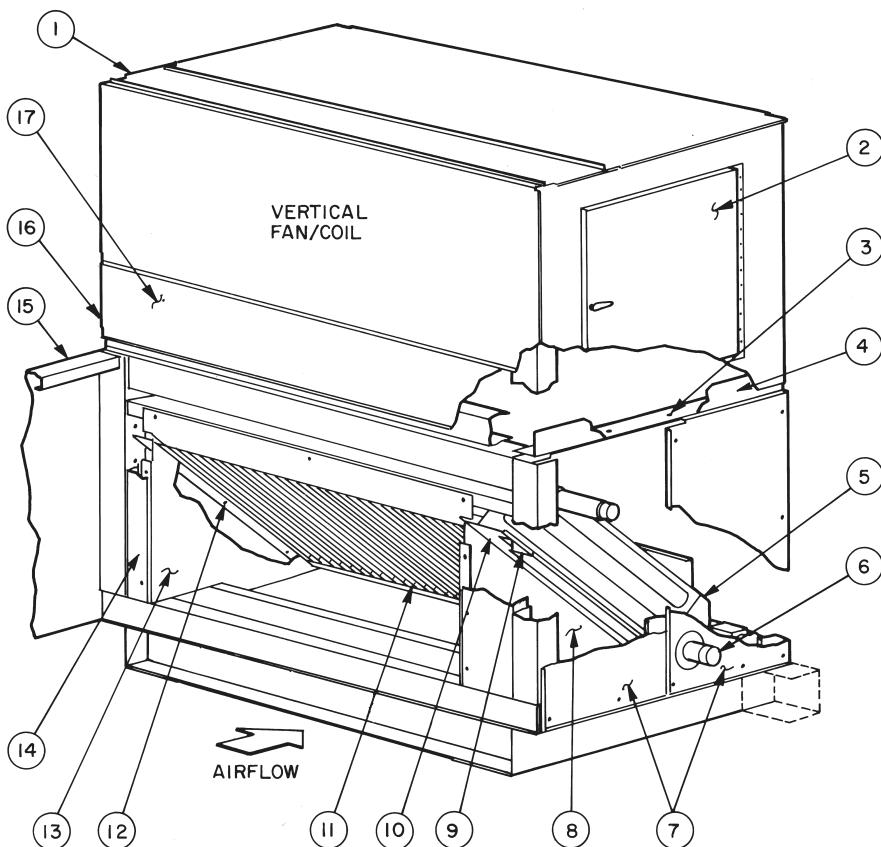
Horizontal Unit Slant Coil Removal (39LA Units — Sizes 03-21)
